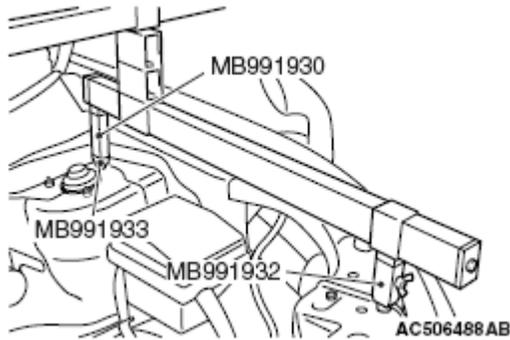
Identifying Special Tool Of Engine And Transaxle Assembly
